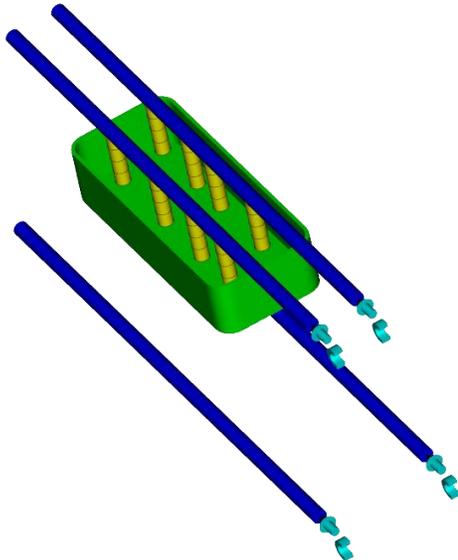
Optimized box model cooling channel layout for drill and plug manufacturing
